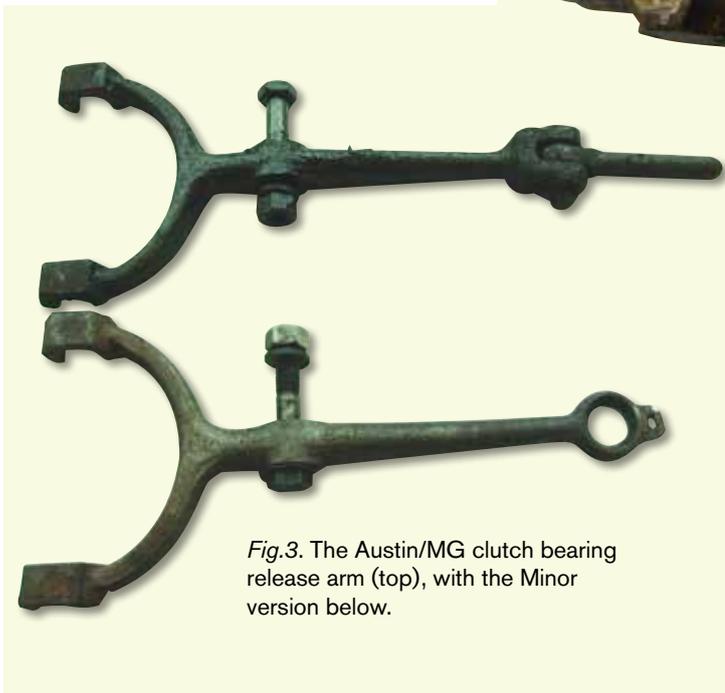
The Austin/MG clutch bearing release arm (top), with the Minor version below.
